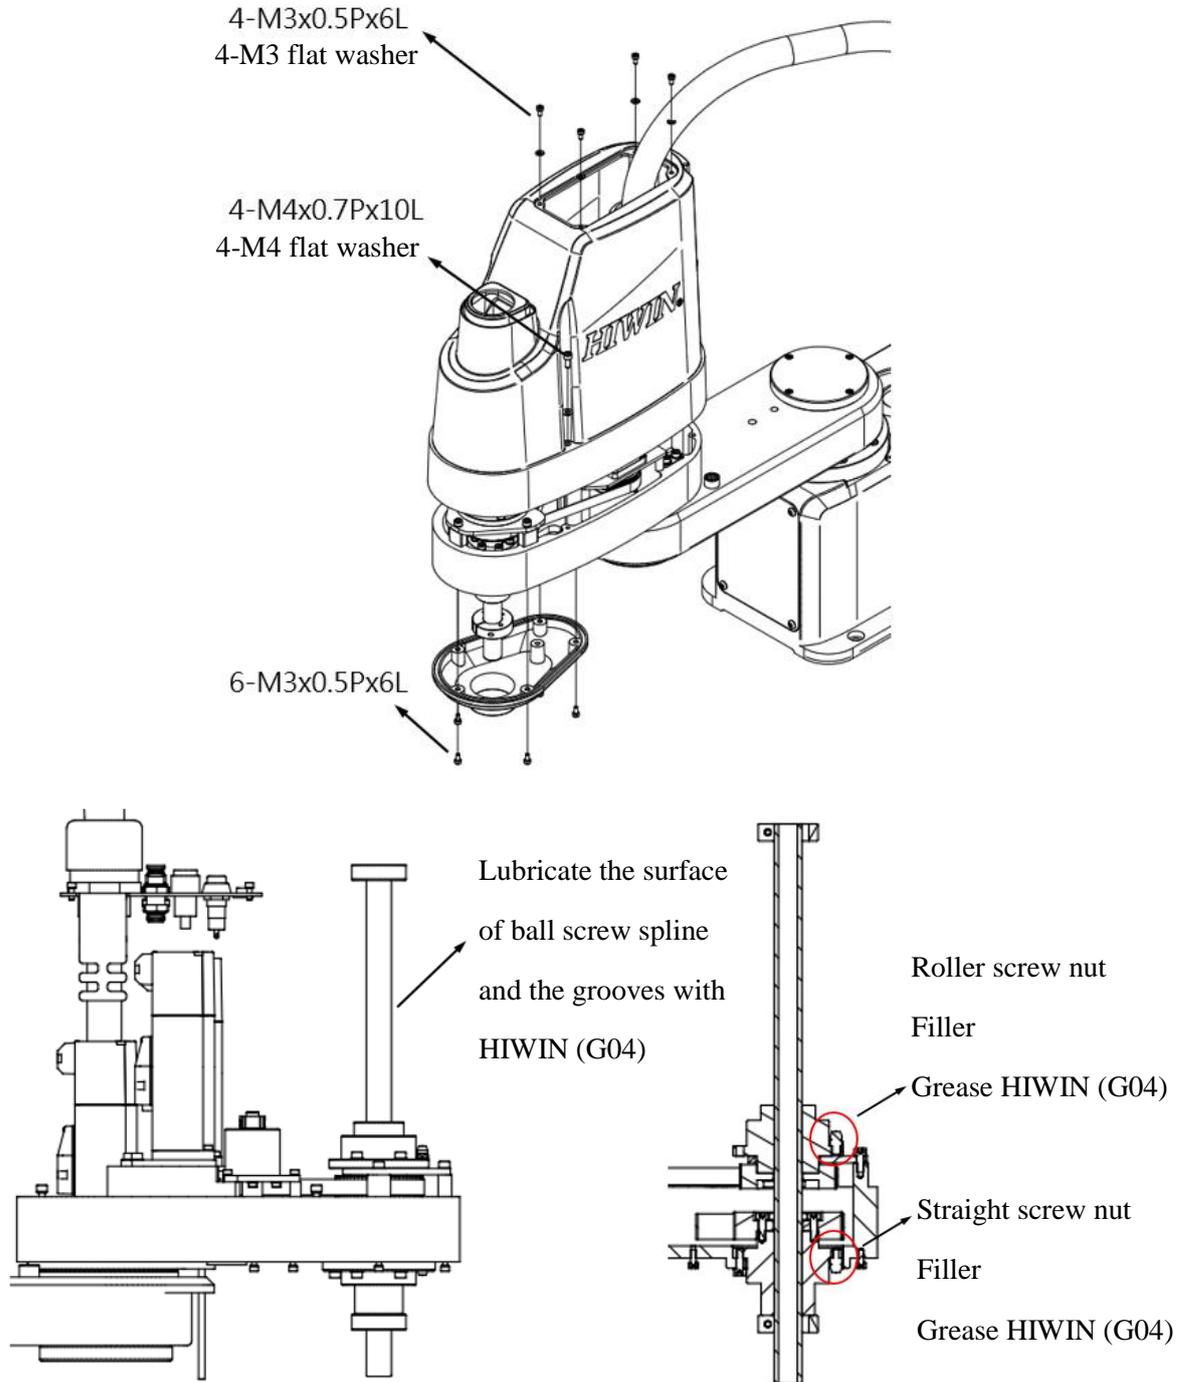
Illustration for Lubricating Ball Screw Spline
